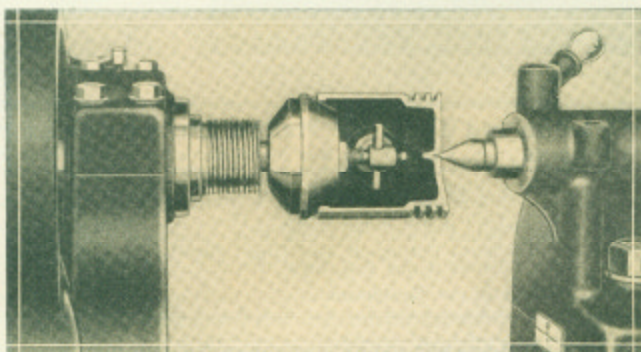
Cross Section of Piston Mounted on a No. 44 Piston Adapter
